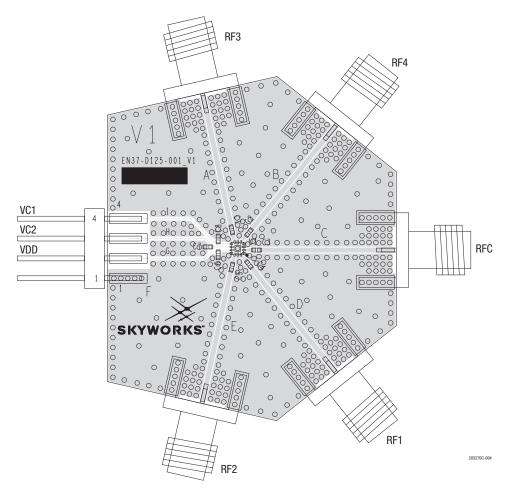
SKY13575-639LF Evaluation Board Assembly Diagram
